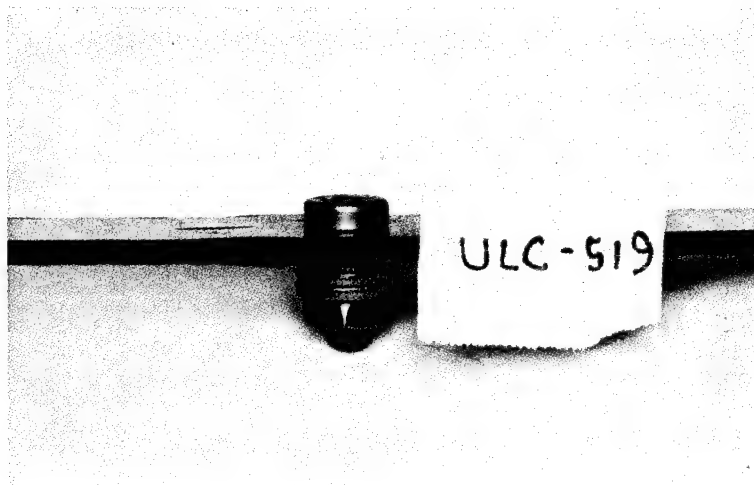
Typical Failure of ULC Specimen with 3/16-Inch Fastener (Lay-Up No. 4)
